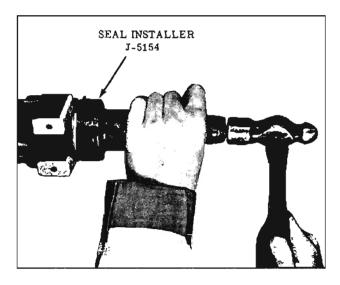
Installing Rear Bearing Retainer Oil Seal
